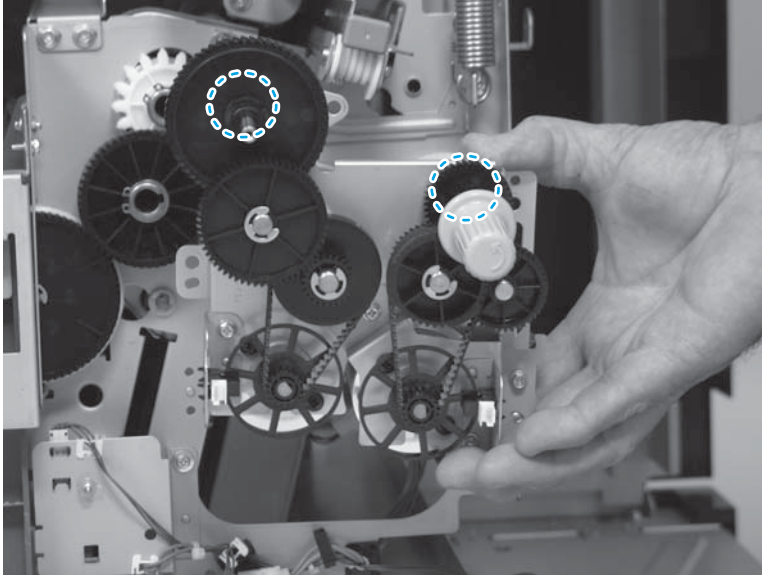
Remove the folding-motor mount assembly (5 of 6)
